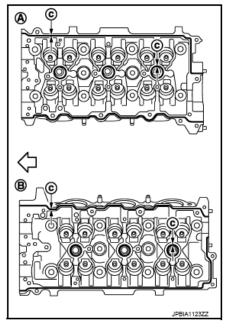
Identifying Liquid Gasket Applying Dimension Of Cylinder Head (Bank 1 And 2) Courtesy of NISSAN MOTOR CO., U.S.A.
